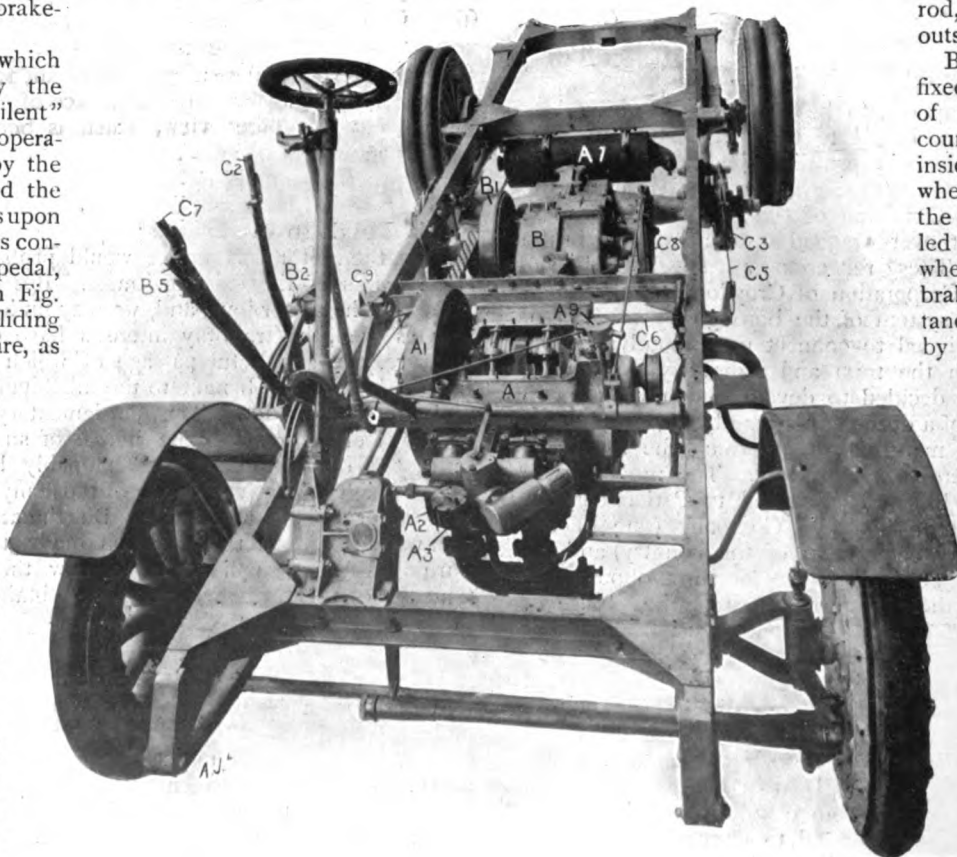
The Wolseley Omnibus Chassis, fitted with a 20-h.p. twin-cylinder engine. This particular chassis has a channel-steel frame, but those now being built have pressed-steel frames.
